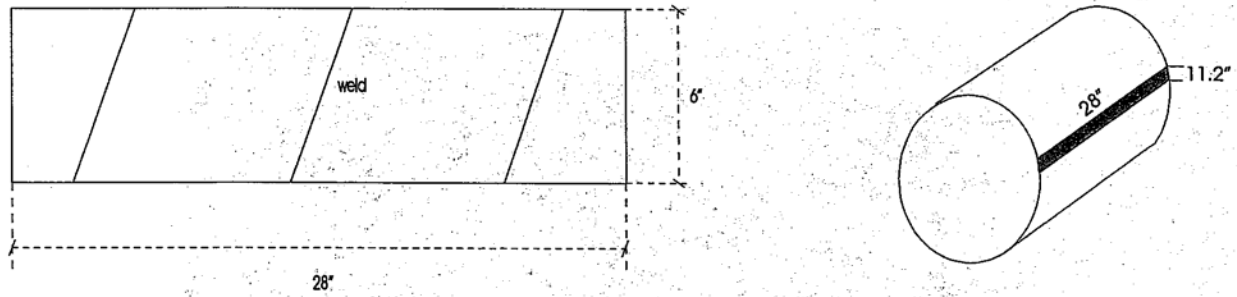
Specimen Cut in the Form of Longitudinal Strip from the Pipe
